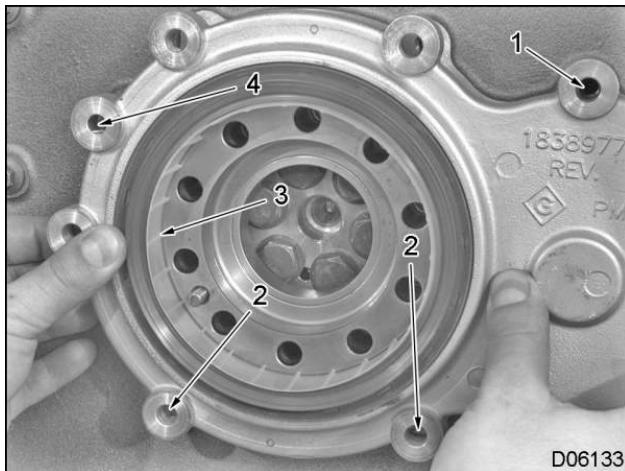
Place Rear Oil Seal Retainer on Secondary Flange Gear
